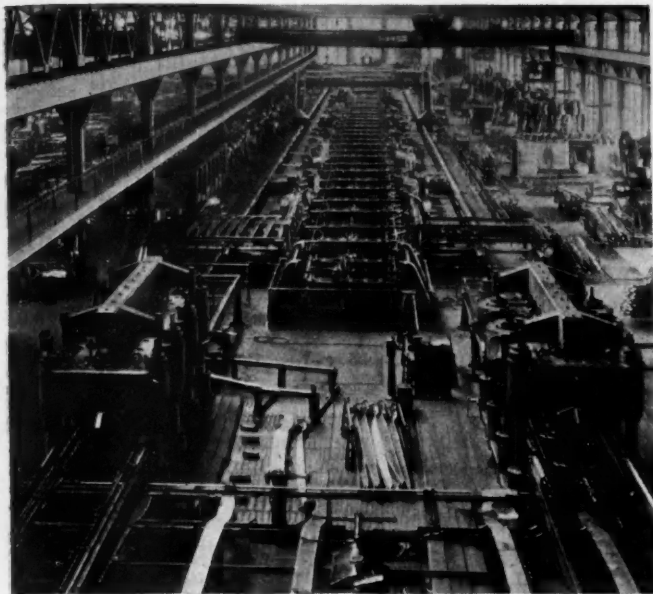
SIDE-MEMBER ASSEMBLY UNIT
